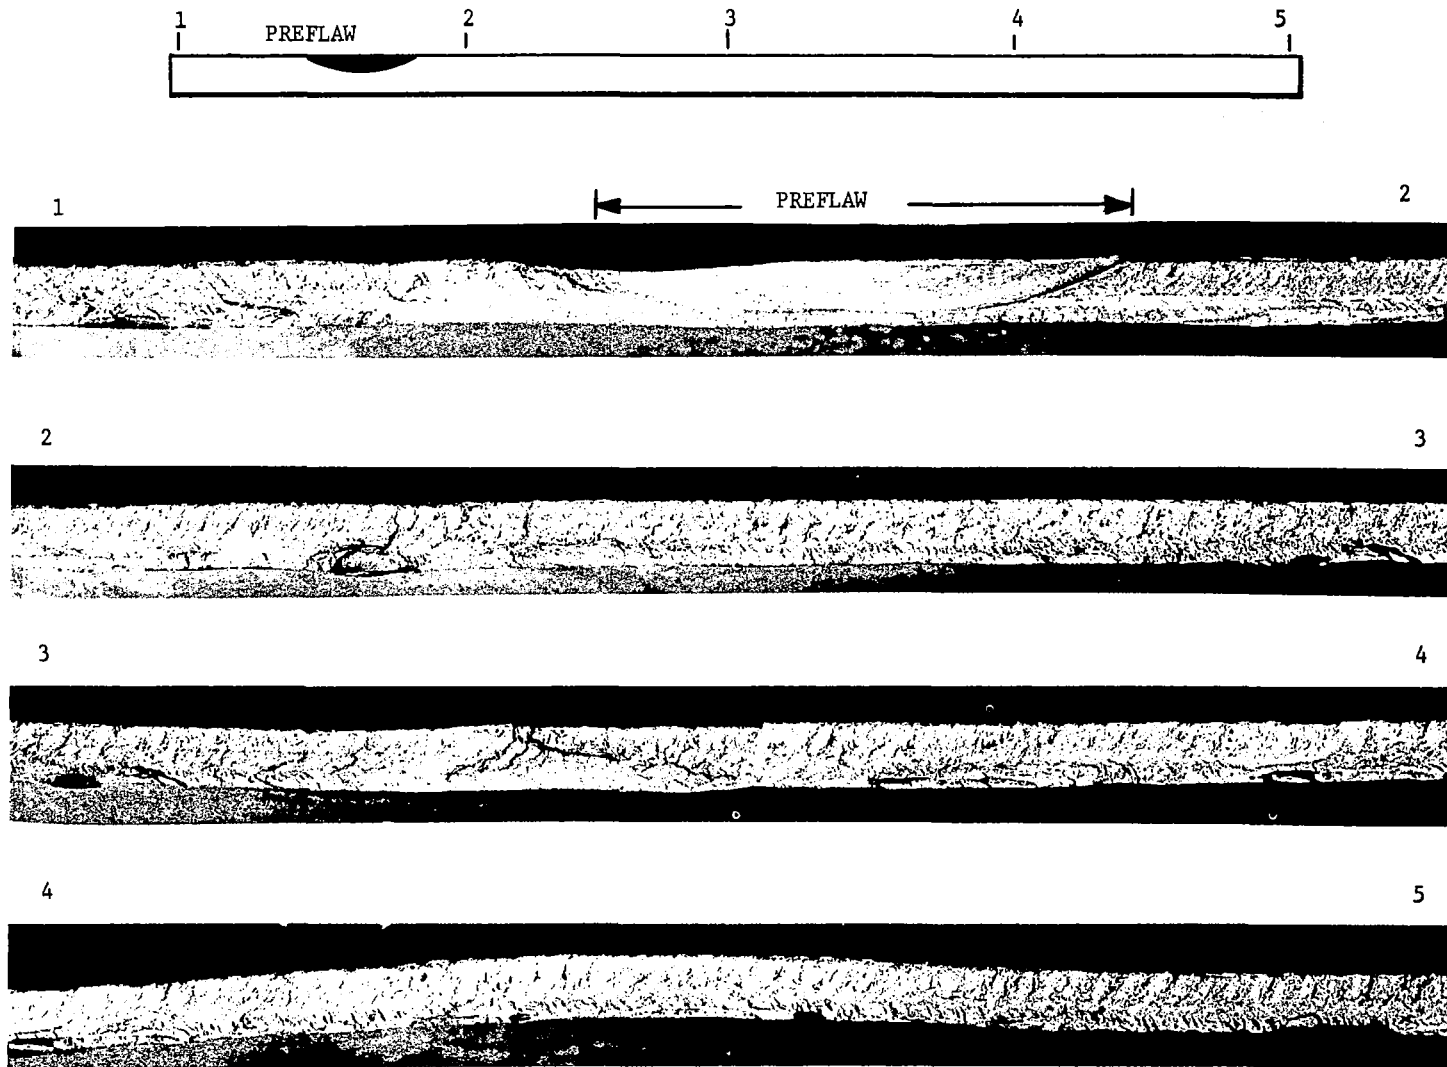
Longitudinal Weld Fracture Faces -2219-T87 Aluminum Vessel Hydroburst at -320°F . Note Preflaw - Failure Originated from this Defect. (Striations on Surfaces are due to Weld Head Oscillation).
